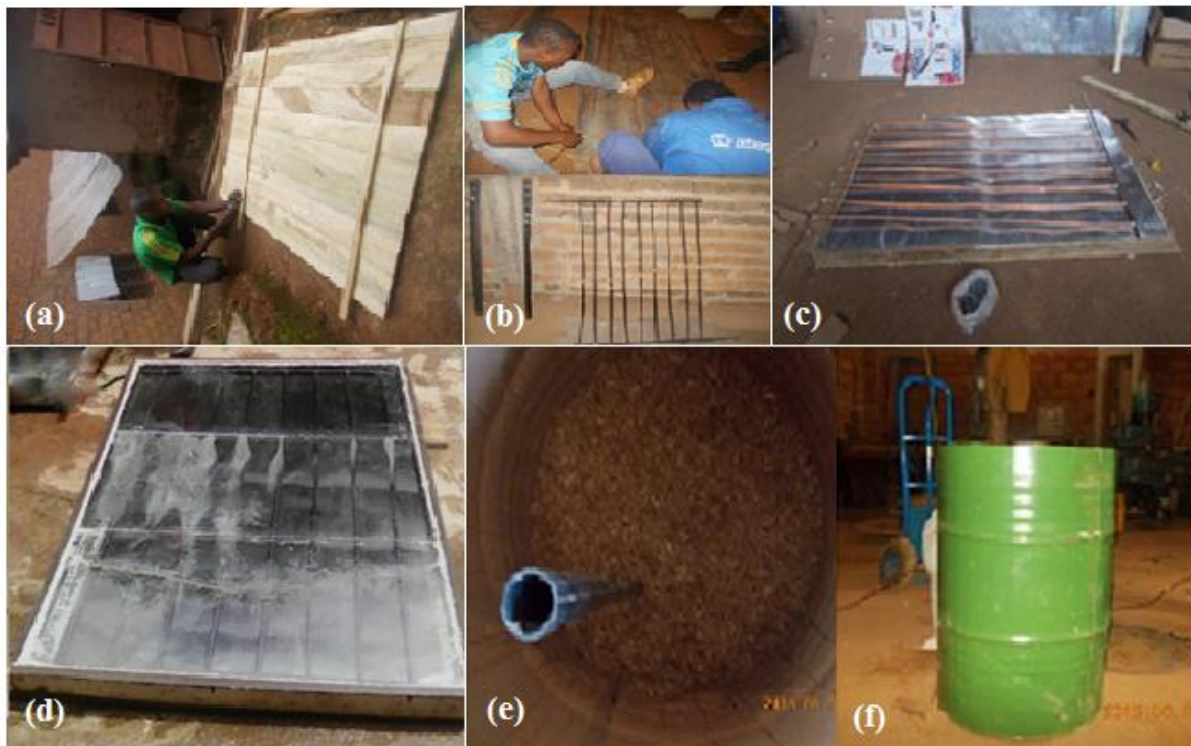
Final TSWH system assembly. (a) manufacturing of the collector, (b) manufacturing of the exchanger, (c and d) manufacturing of the absorber, (e and f) manufacturing of the storage tank.
